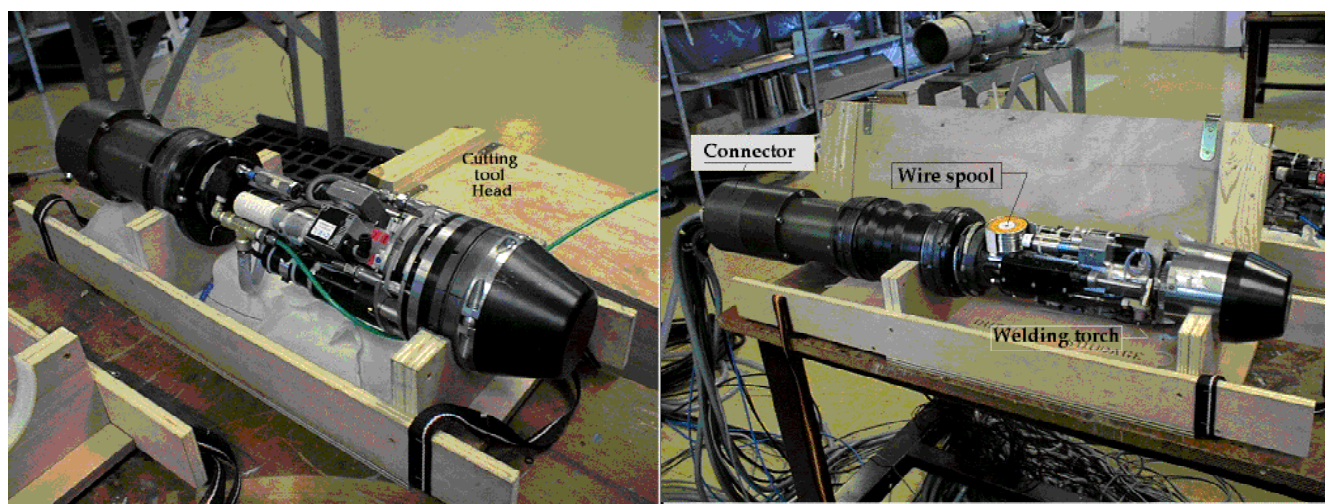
Pipe Cutting and Welding Tools
